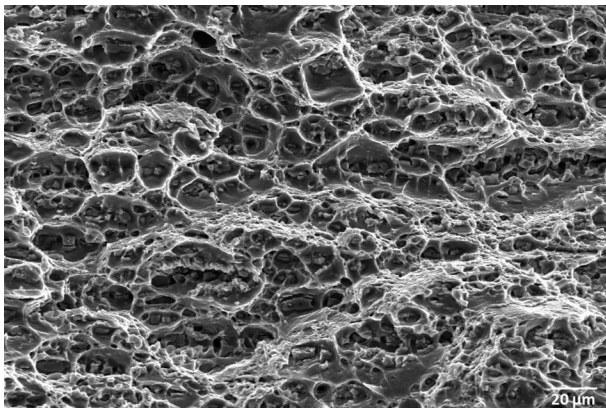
Higher magnified image of fracture surface shown in Fig. 106
